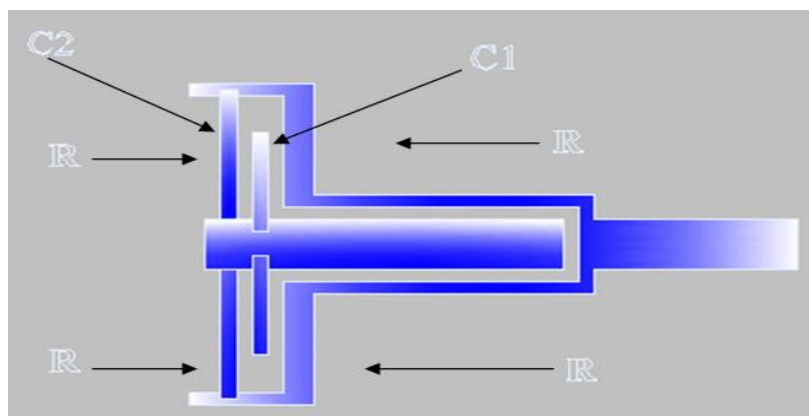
sectional view of set of multi-plate clutches (solid work model)
